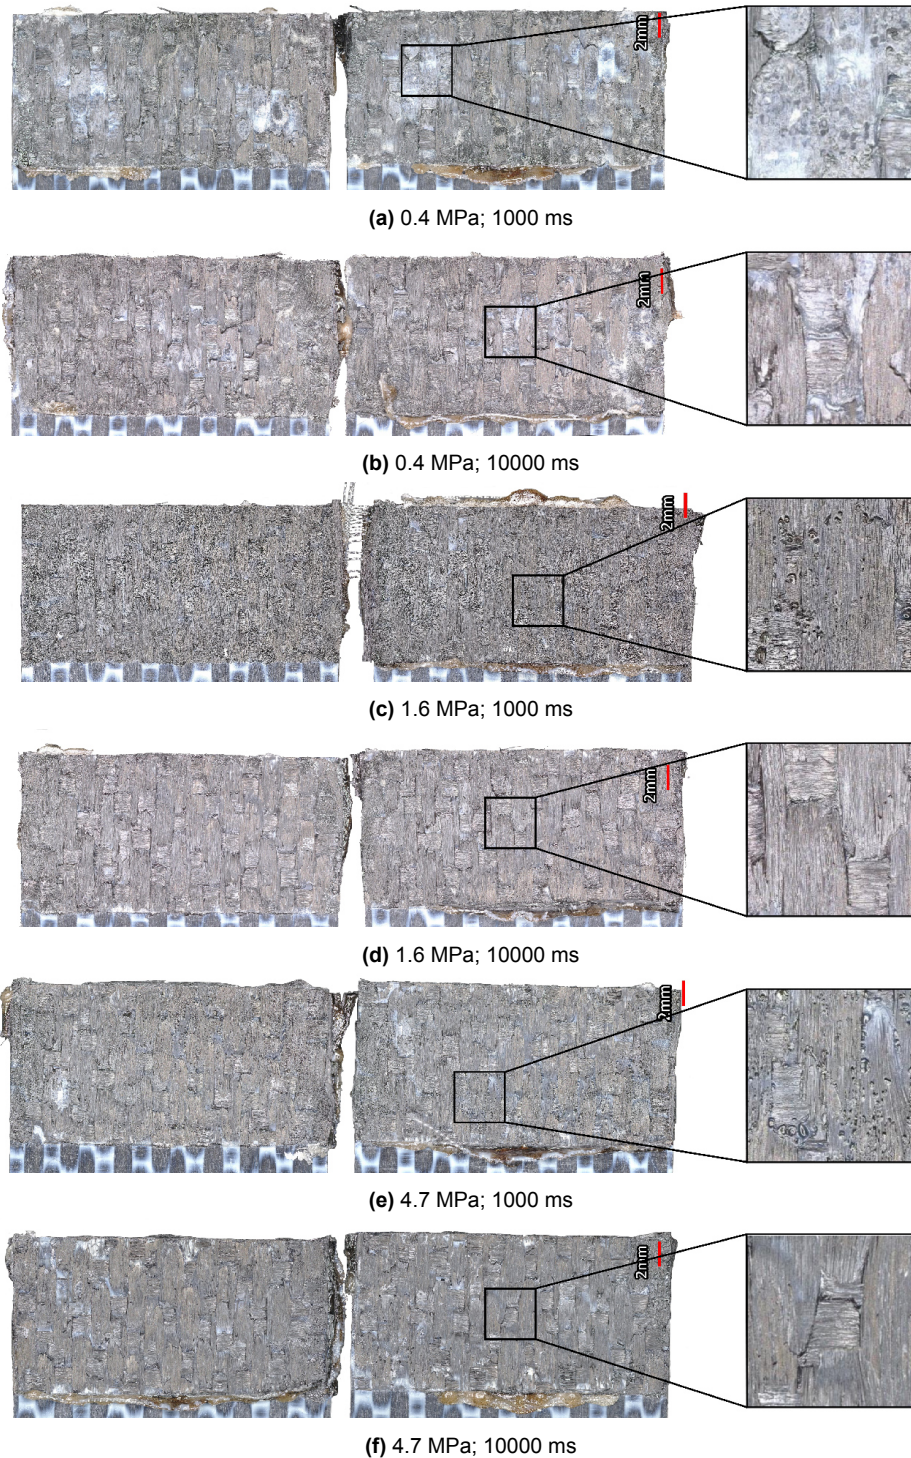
Fracture surface of welds at varying consolidation pressure and time; Vibration amplitude - 80 μm , welding pressure - 1.6 MPa (500 N), weld control - displacement to 0.07 mm
